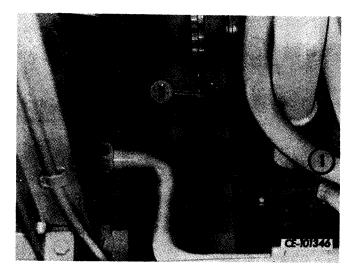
Late Fuel Pump Mounting. SM-H-90E (Rev. No. 4 11-71)
